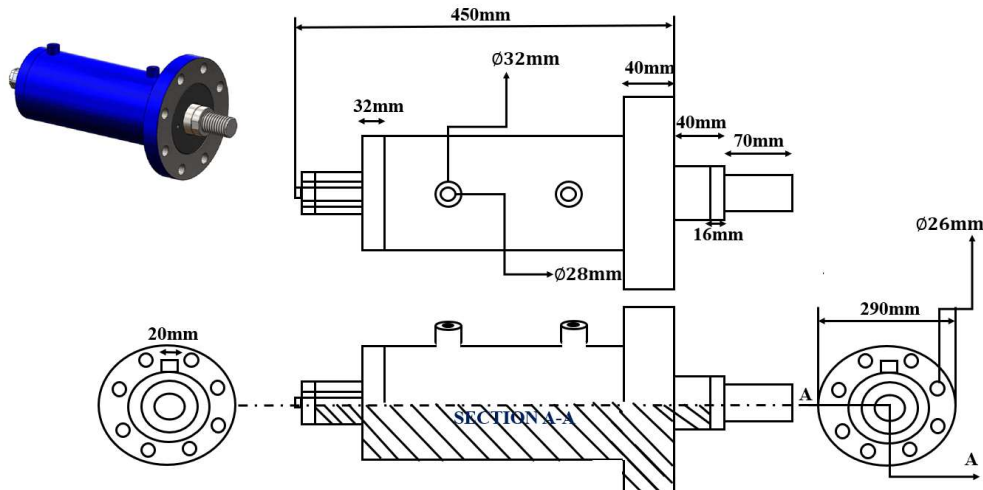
Upper hydraulic cylinders top, front, side and isometric view
